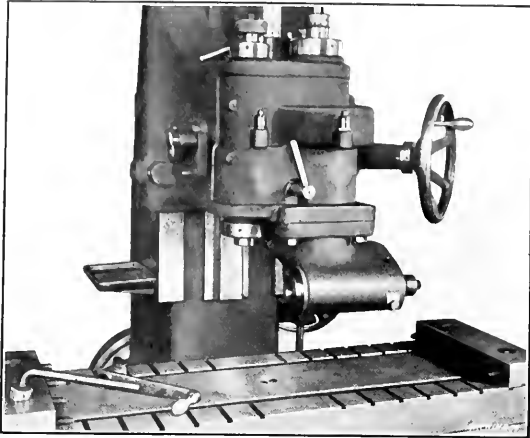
Cherrying Attachment set up on Pratt & Whitney Die-sinking Machine
